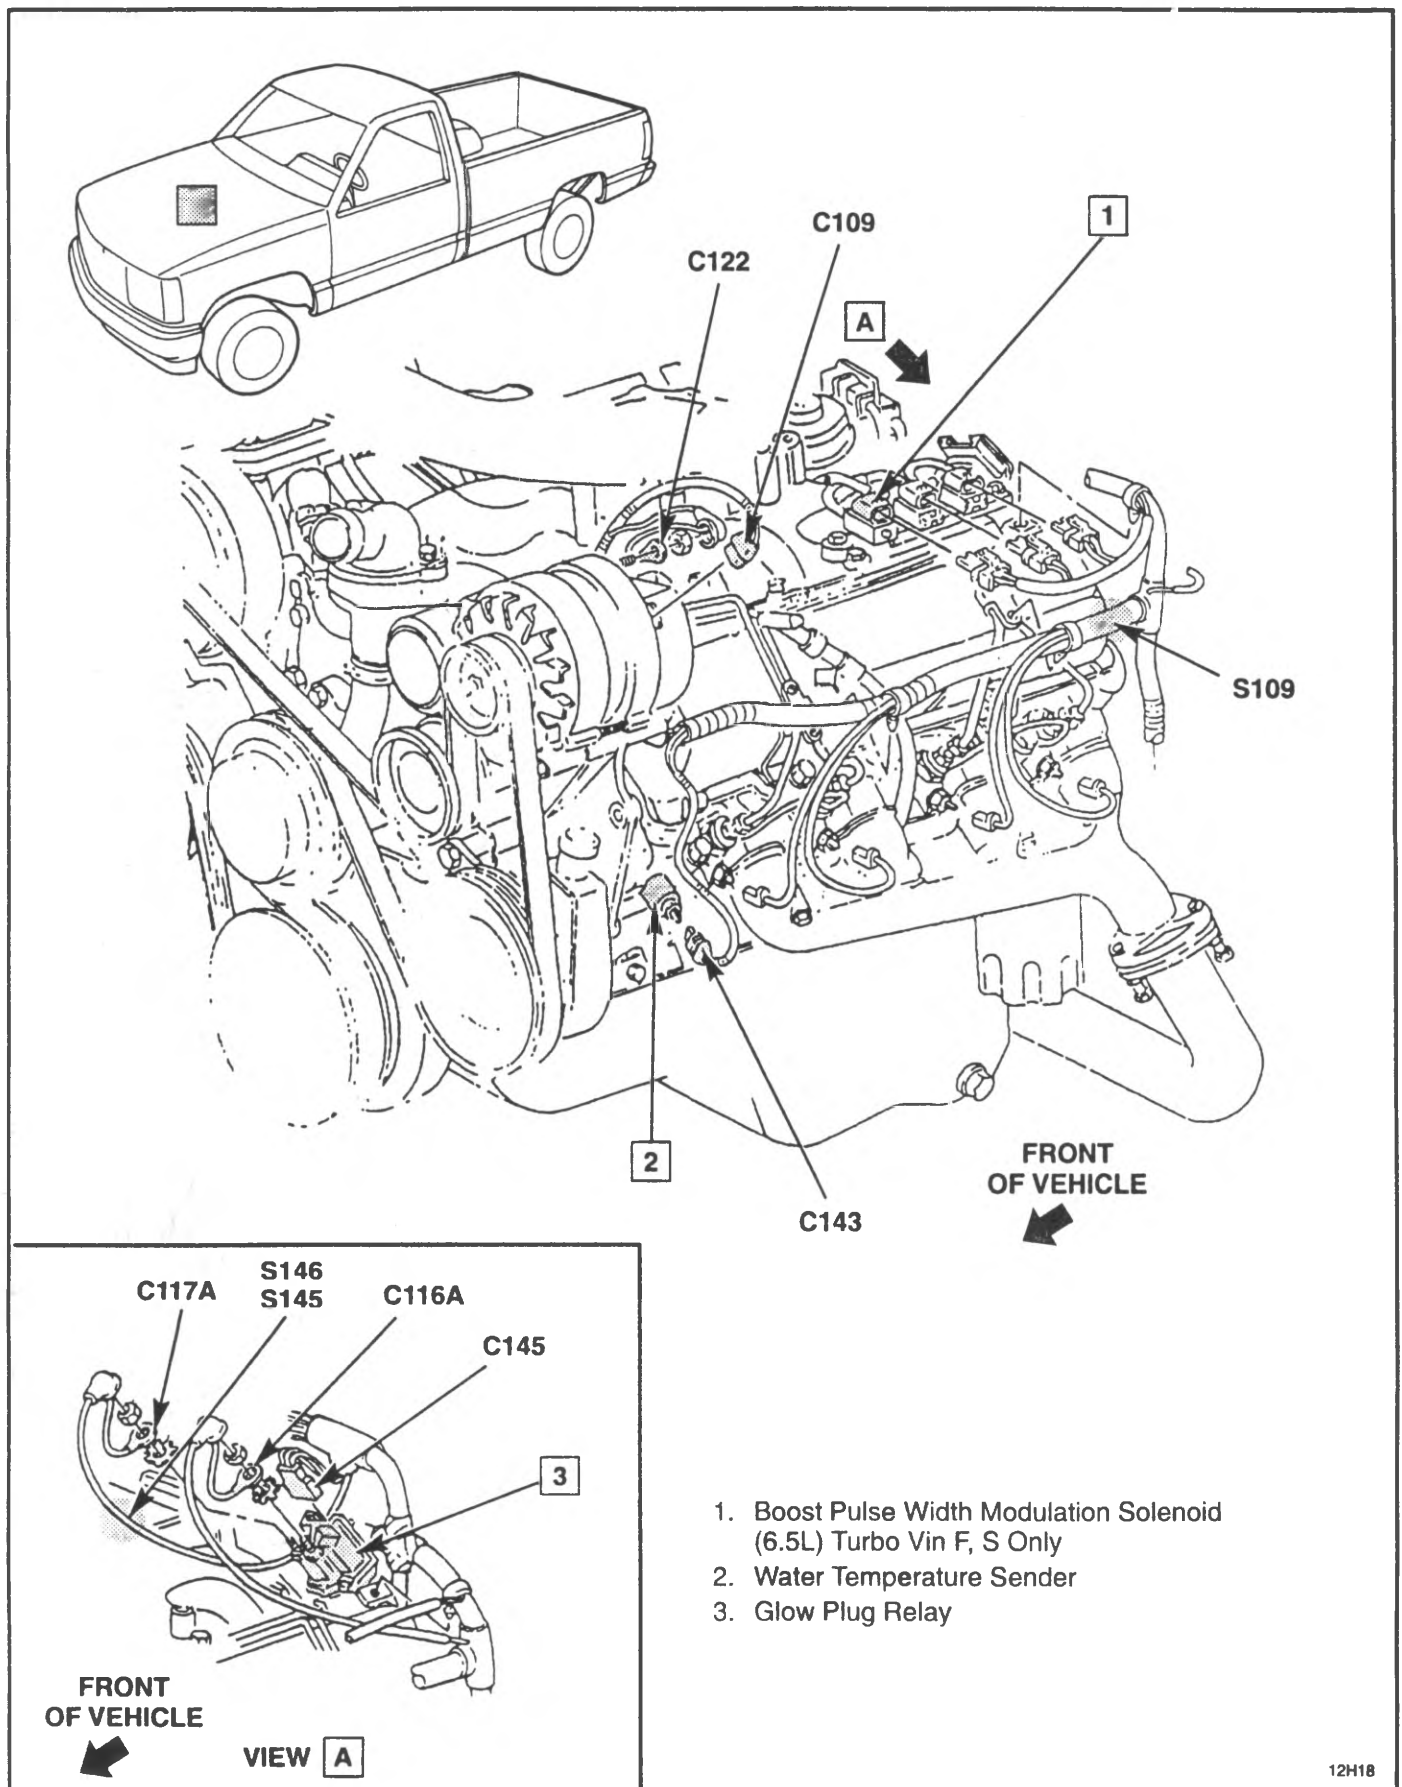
6.5L Diesel Engine Wiring, LH Side
